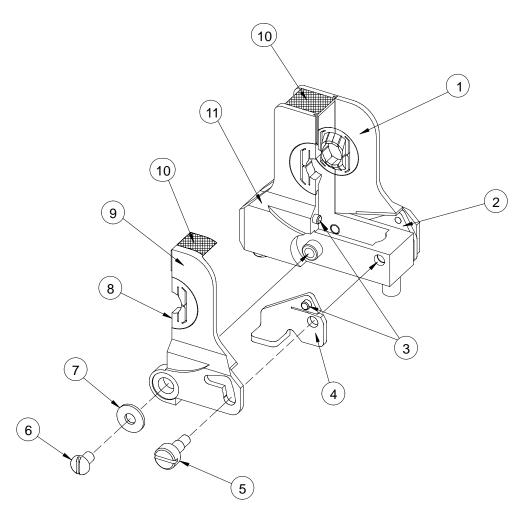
CWS-4MFA- Micro Weld Head Fixture
